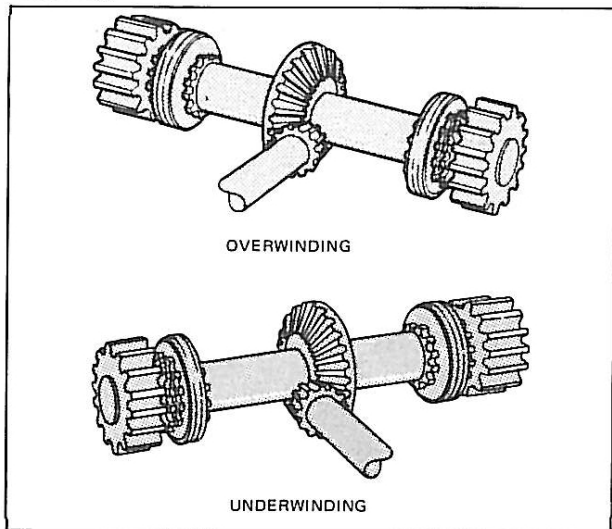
Bevel Gear Shaft Overwind and Underwind Arrangement
